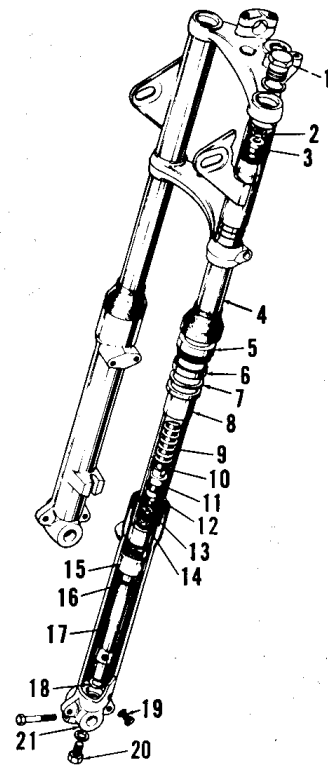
Exploded view of front suspension used on later model Commandos.
